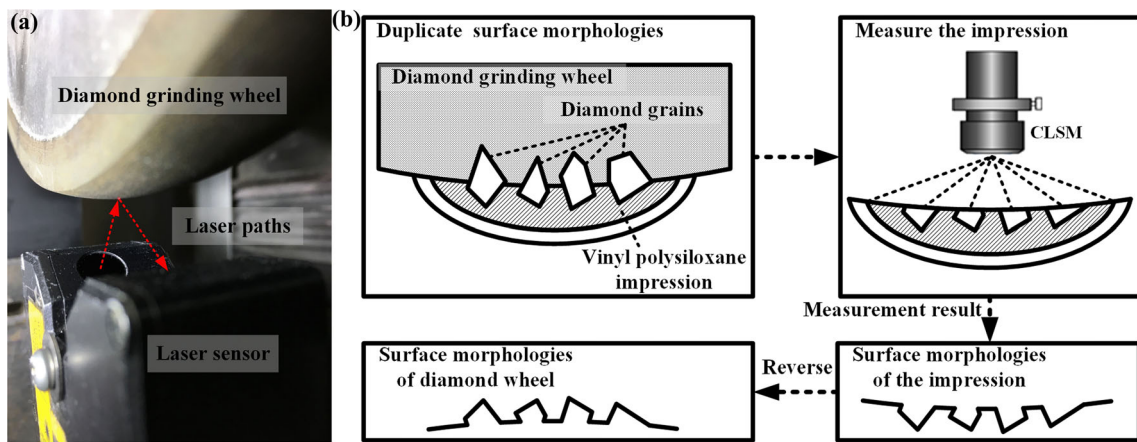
Measurement of a profile of wheel arc, b surface morphologies of wheel surface
